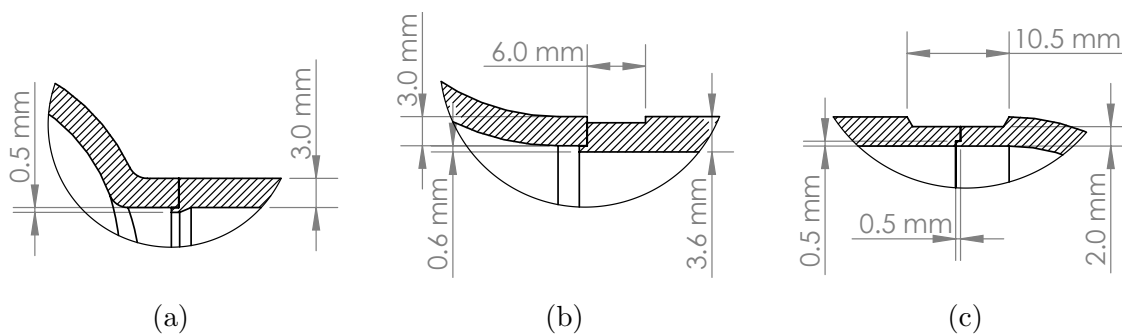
The weld preps on the a) RF ports, b) beam pipes, and c) full penetration welds on the cavity body. The surface welds performed on the RF ports and beam pipe require only a small step to aid in alignment of the parts and the TIG torch. For the full penetrations welds, the material is thinned to 2 mm to limit the heat required to weld through the thickness.
